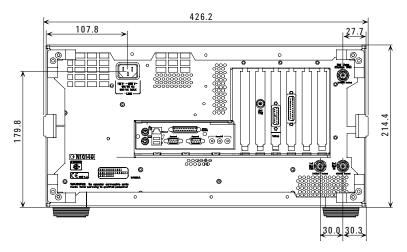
Main unit dimensions (rear view, in millimeters, nominal)
